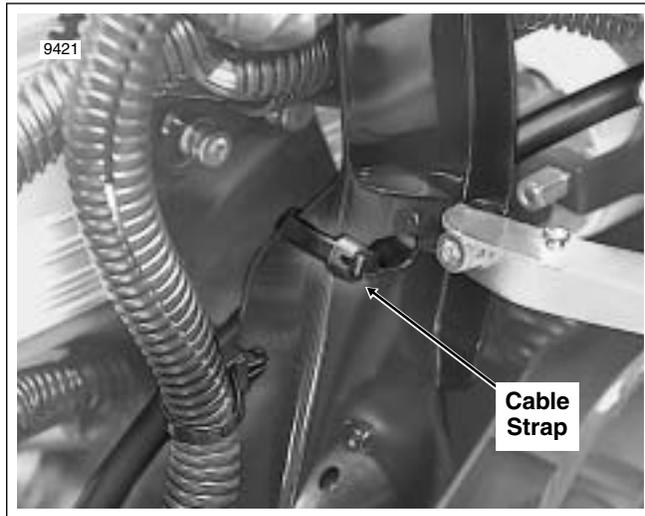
Secure Clutch Cable to Fairing Bracket
